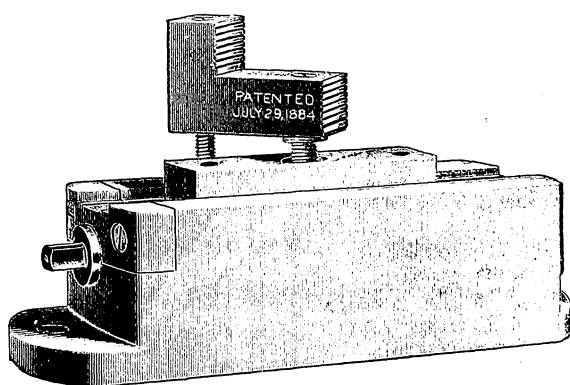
Method of Reversing Jaw Shown in Fig. 2.
